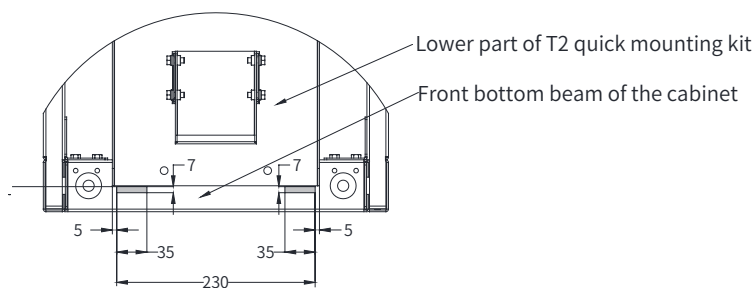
Dimensions of holes on the front bottom beam of the cabinet (unit: mm)
